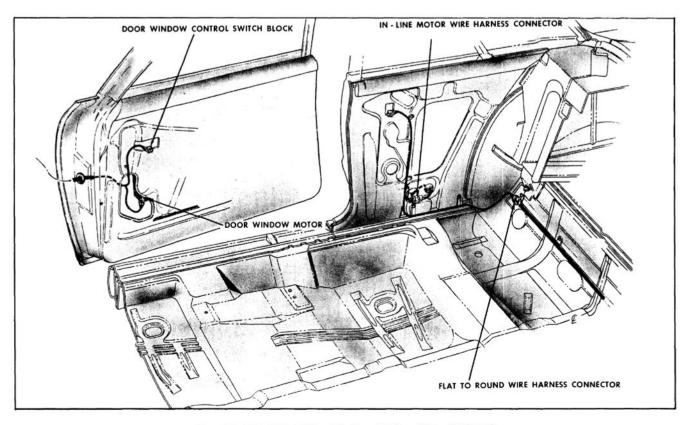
Right Side Window Wiring (27 - 37 Style)
